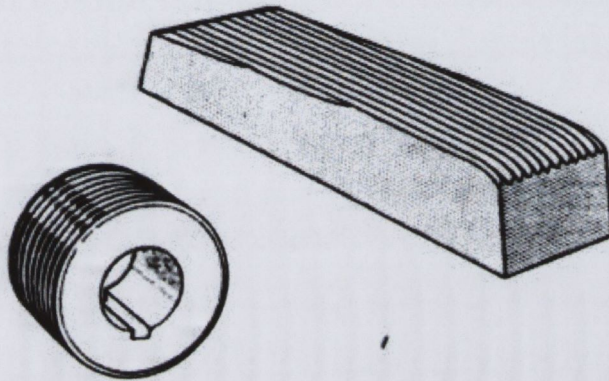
A Flat and a Cylindrical Thread Rolling Die
